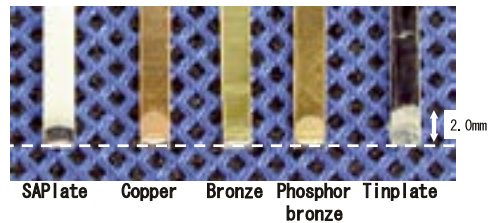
Appearance of samples after reflow soldering test (Sn-58Bi solder paste)
